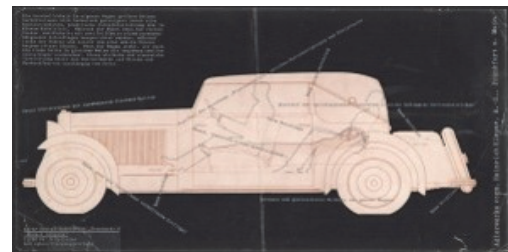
Side view drawing of Adler Standard 8 Sedan
